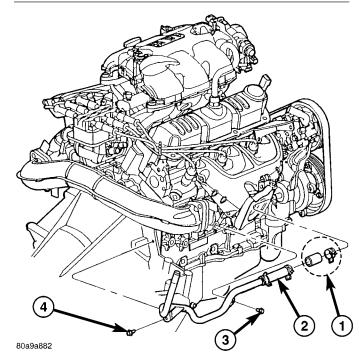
HEATER RETURN HOSE (Without Engine Oil Cooler)
